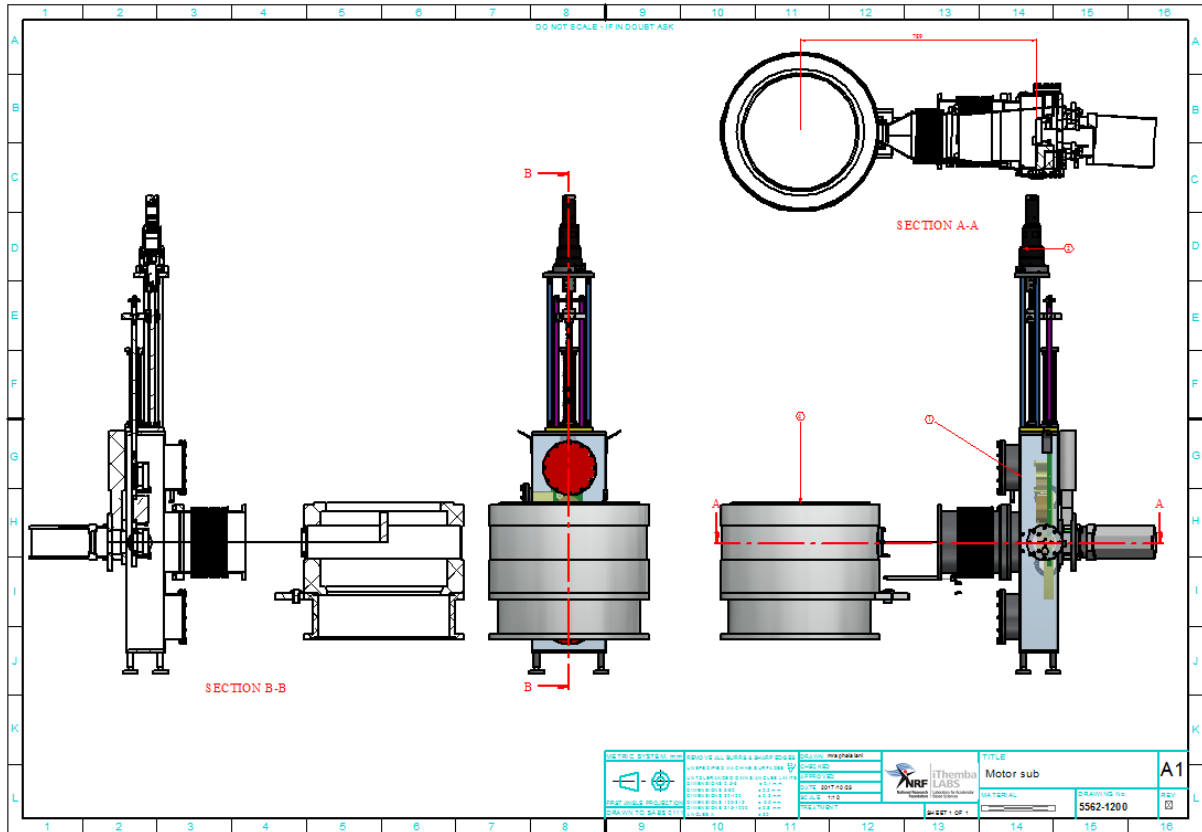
The prototype assembled with the sliding seal scattering chamber.
